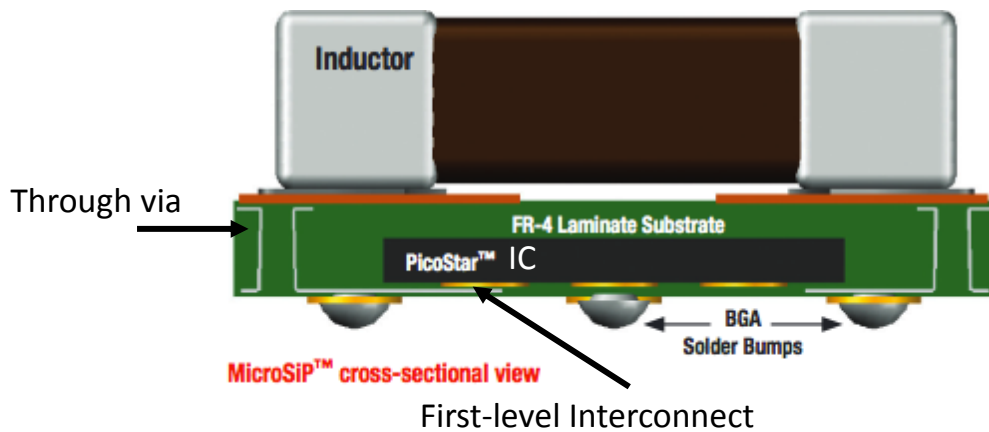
Cross-sectional view of TI's MicroSIP power converter module. [8]
